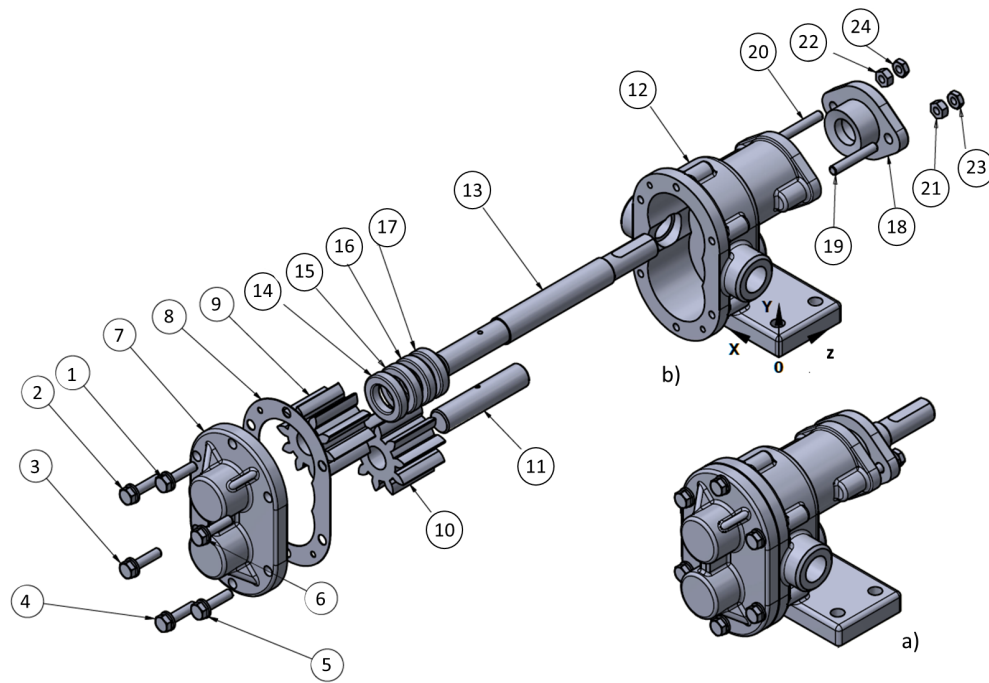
Gear Pump B: (a) assembled view; (b) exploded view.
